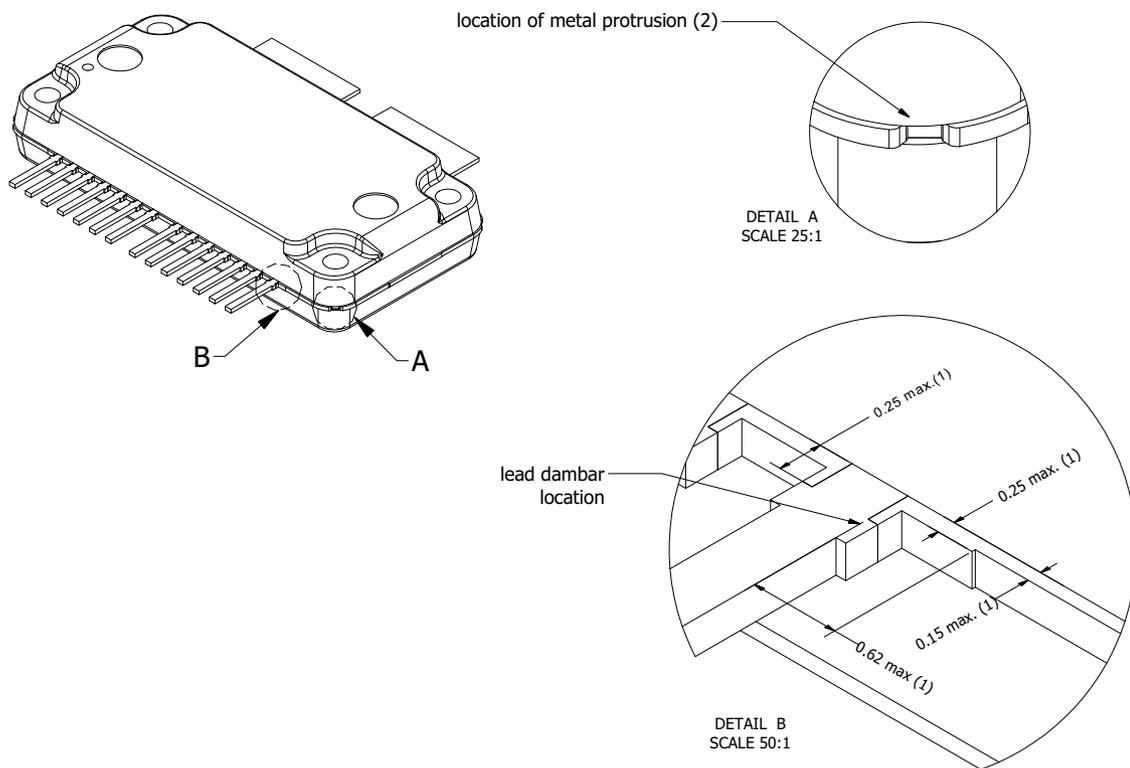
Package outline SOT1211-3 (sheet 1 of 2)
